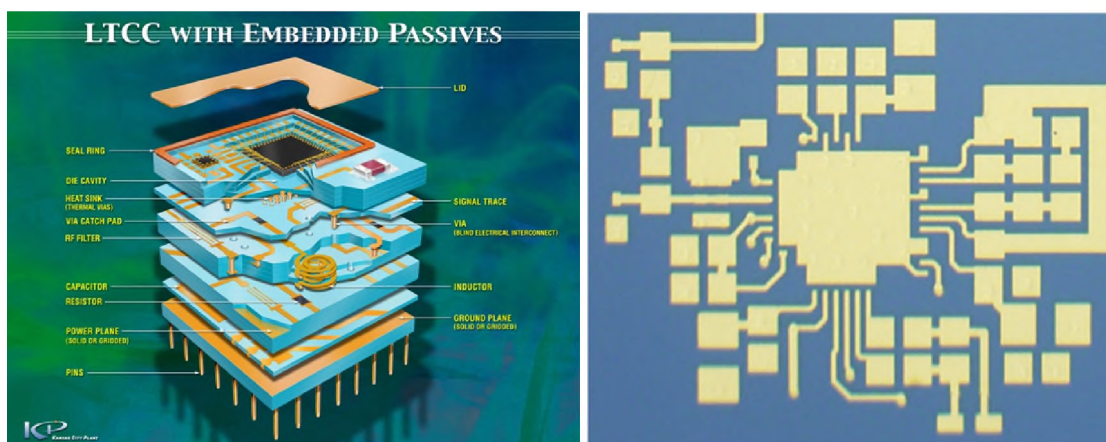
(left) Exploded view of an MCM-C with surface mount and embedded passive components. (right) Thin film pattern definition on LTCC. ©Copyright Honeywell Federal Manufacturing & Technologies LLC, 2019
